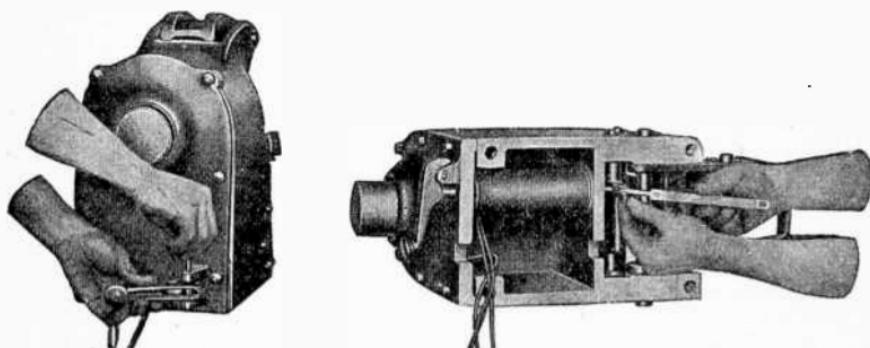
,182.—*How to assemble an air circuit breaker 21.* Attaching trip lever to solenoid magnet frame.
